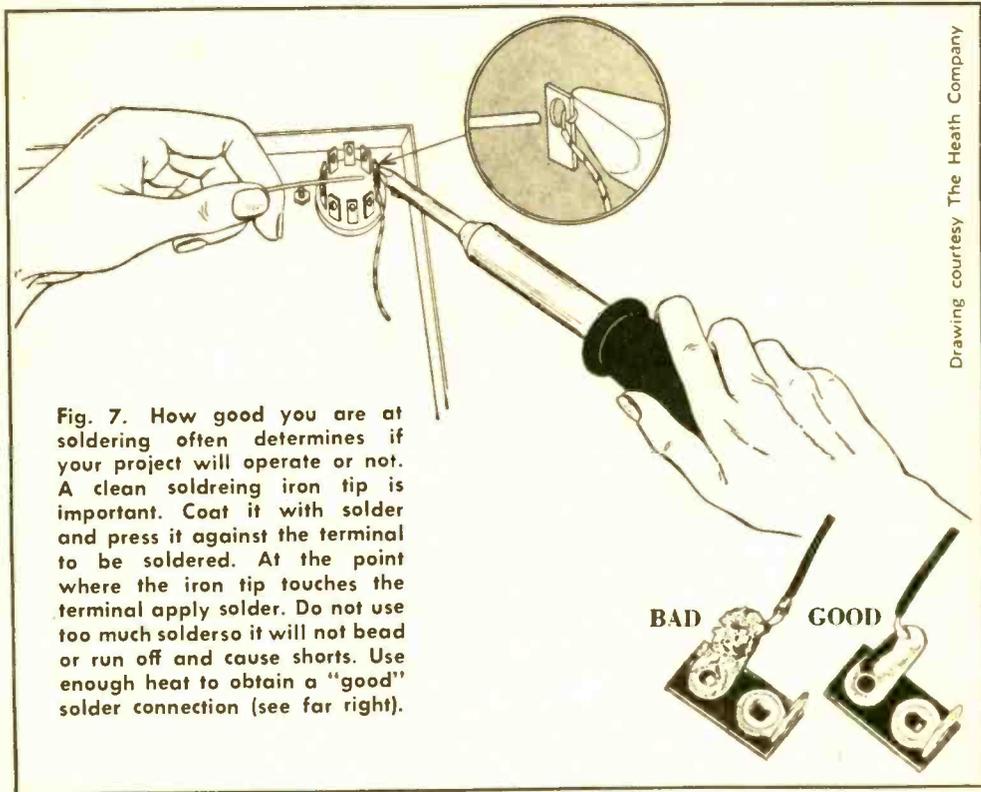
How good you are at soldering often determines if your project will operate or not. A clean soldreing iron tip is important. Coat it with solder and press it against the terminal to be soldered. At the point where the iron tip touches the terminal apply solder. Do not use too much solder so it will not bead or run off and cause shorts. Use enough heat to obtain a "good" solder connection (see far right).
